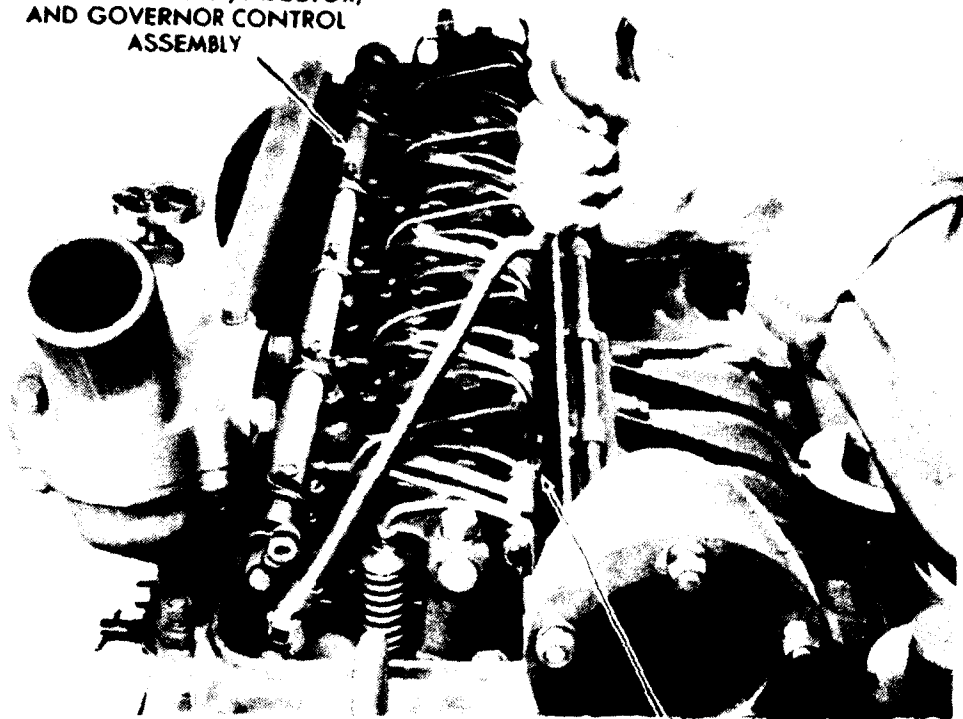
Cylinder Head with Rocker Arm Cover Removed
